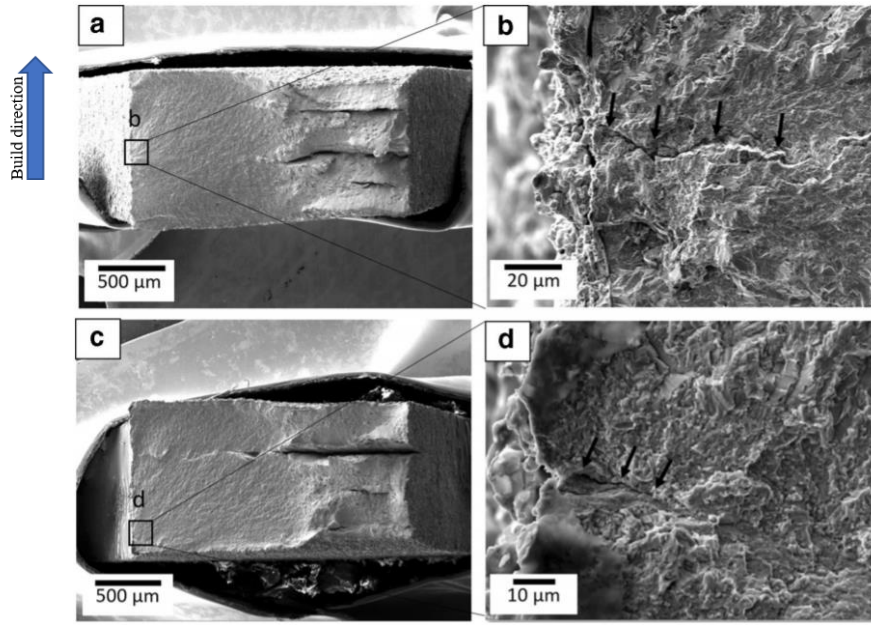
HCF fracture surface caused by delamination of as-deposited IN625 fabricated by the MELD process [51].
